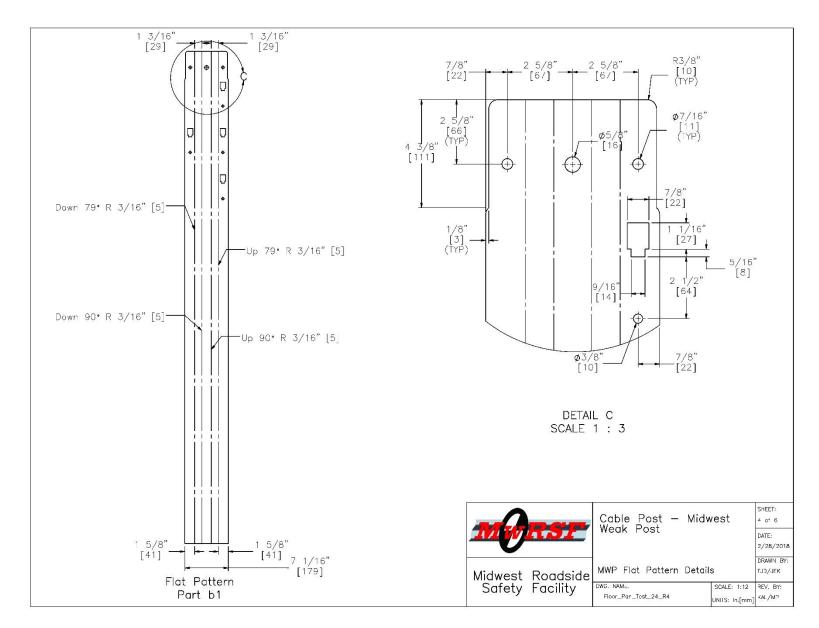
MWP Flat Pattern Details, Test No. MWPFP-24
